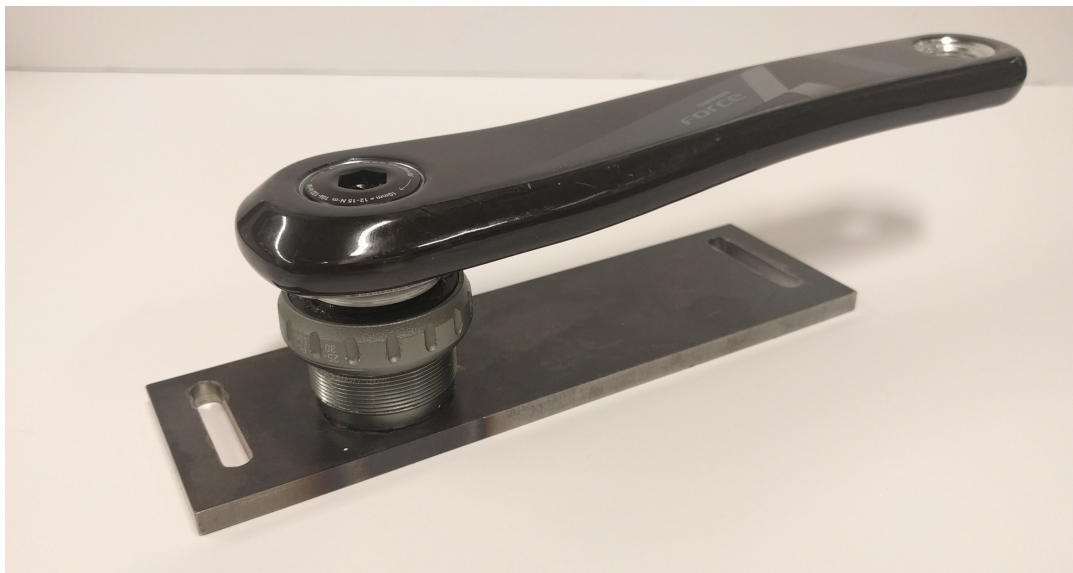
Final fixture mount design assembled with the bottom bracket (light grey) in place and the crank arm mounted.
